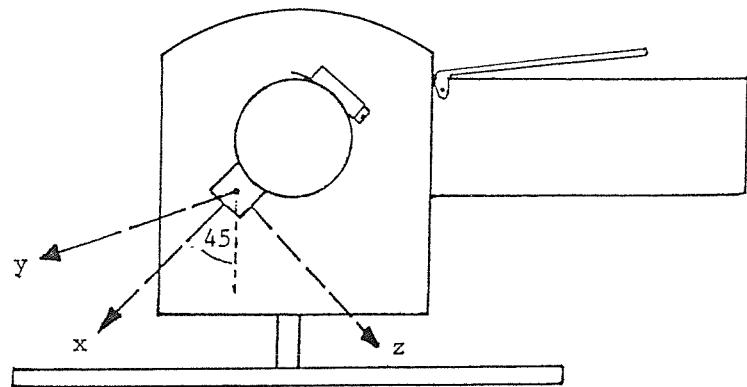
Hose clip accelerometer mount on left handle of vertical grinder (The same arrangements were made with the rotary sander and the power wire brush)
